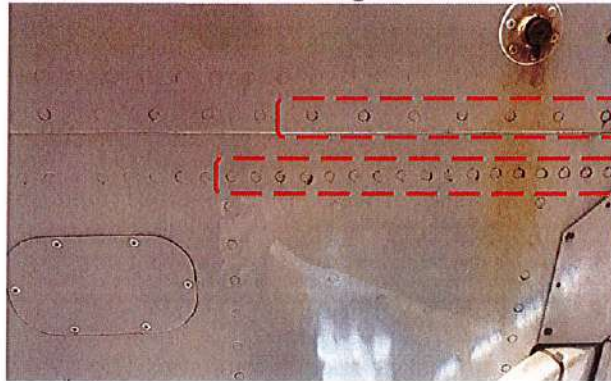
Paint cracking around rivets on Sling 2 wing
